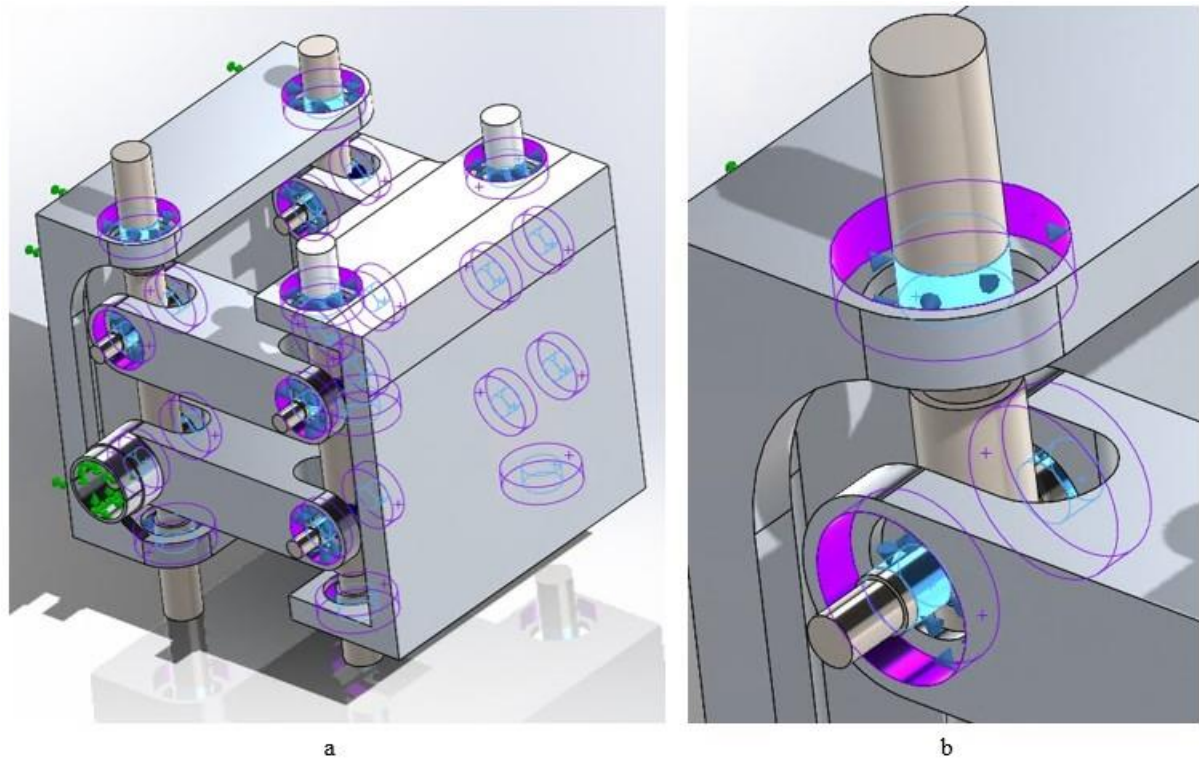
Bearing connectors. (a) The 24 bearing connectors within the FEA. (b) A close-up of three bearing connections.
